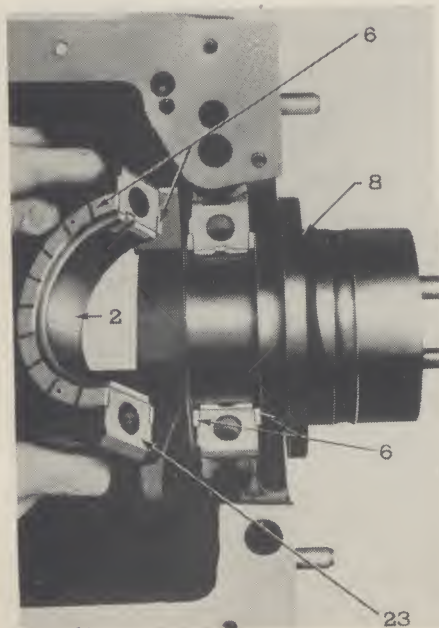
A—A GM engine showing separate thrust washers (6) at rear main bearing to control crankshaft end play.
